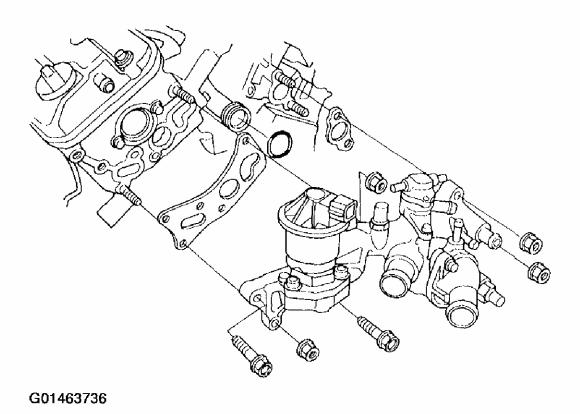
Removing The Water Passage Courtesy of AMERICAN HONDA MOTOR CO., INC.
